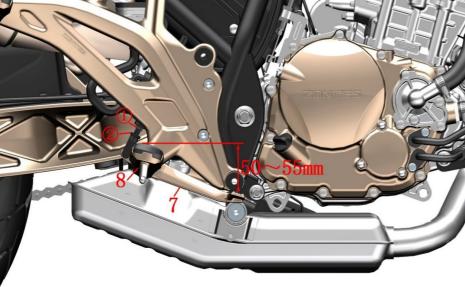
pedal component		Pedal adjustment	CHK	(0)
